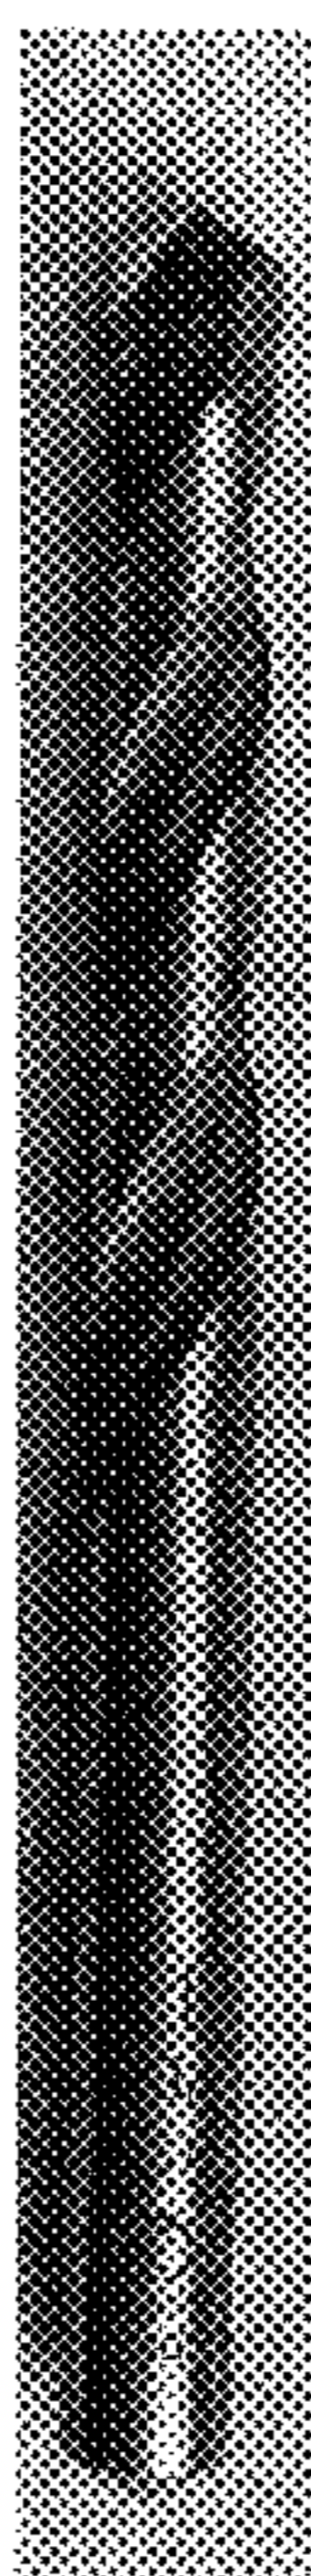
is an enlarged rear view of the upper portion of the drill bit shown in FIGS. 1-6; and,
